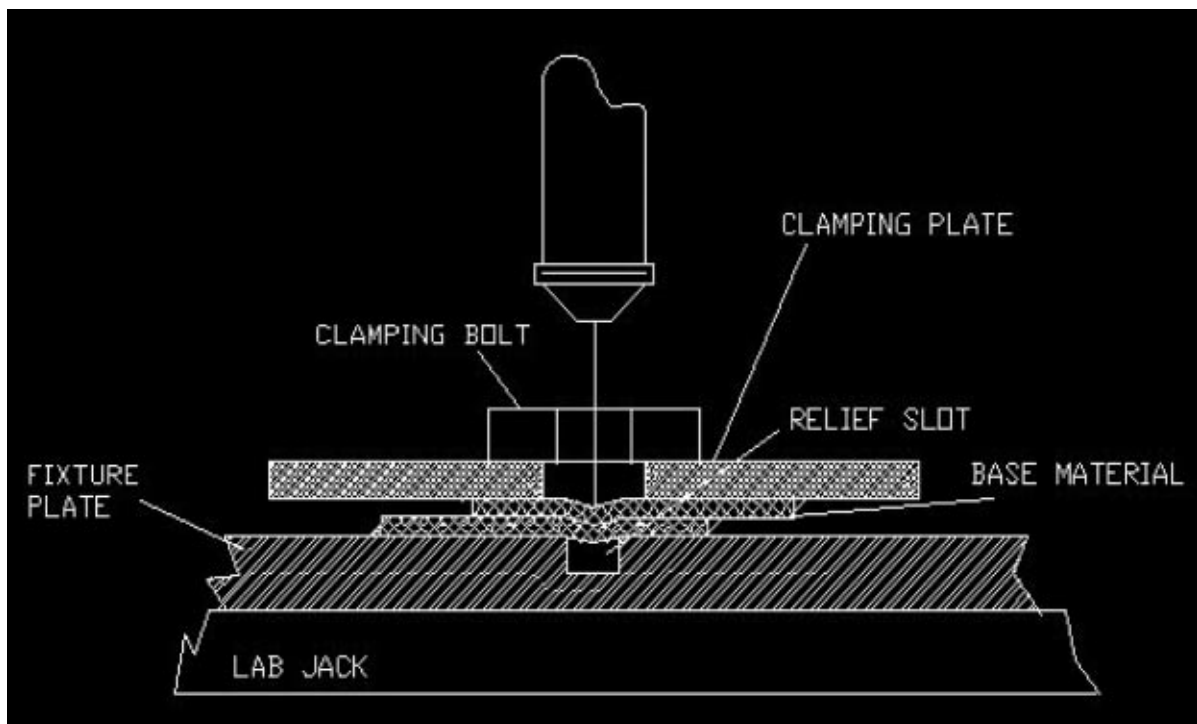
Schematic of the laser-welding fixture used in experiments.
